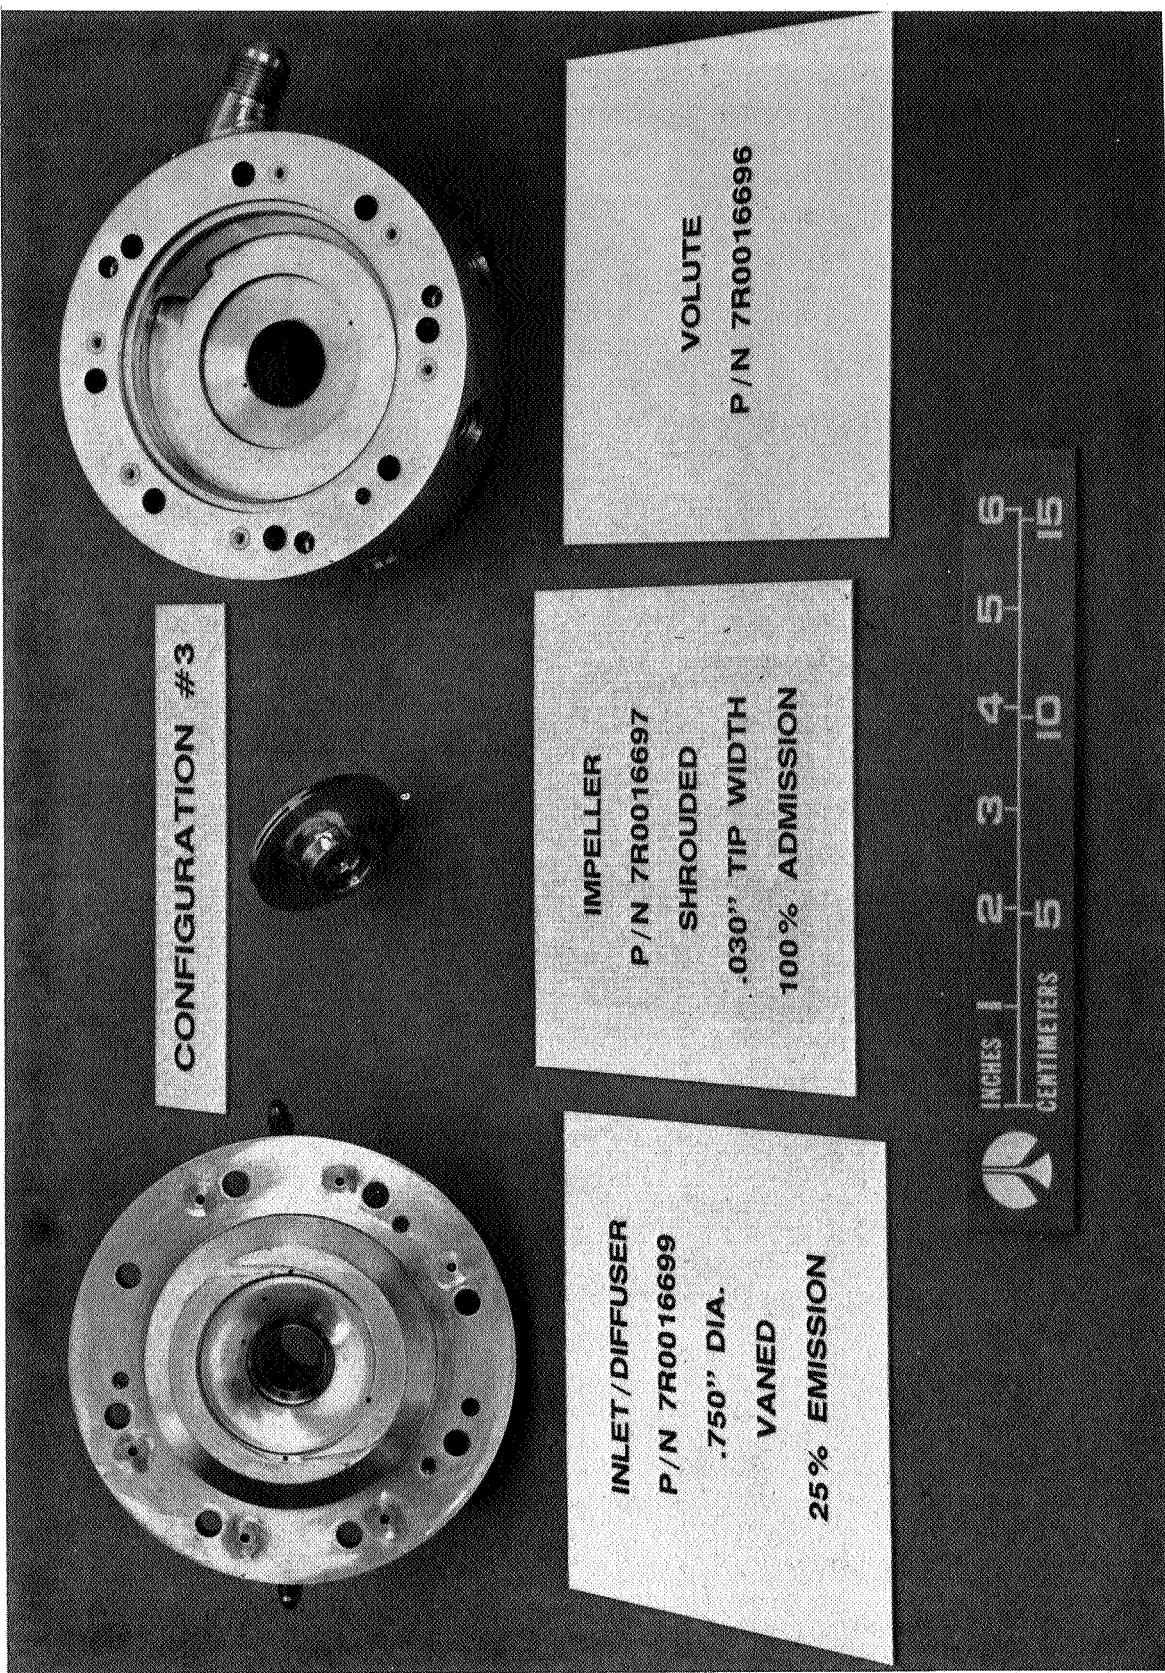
Shrouded Impeller Vaned Diffuser Pump
